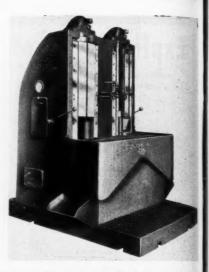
The Colonial "Dual Ram" surface broaching machine carries receding tables a standard equipment. Available in eleven size and strokes of 36, 48 and 60 inches.
